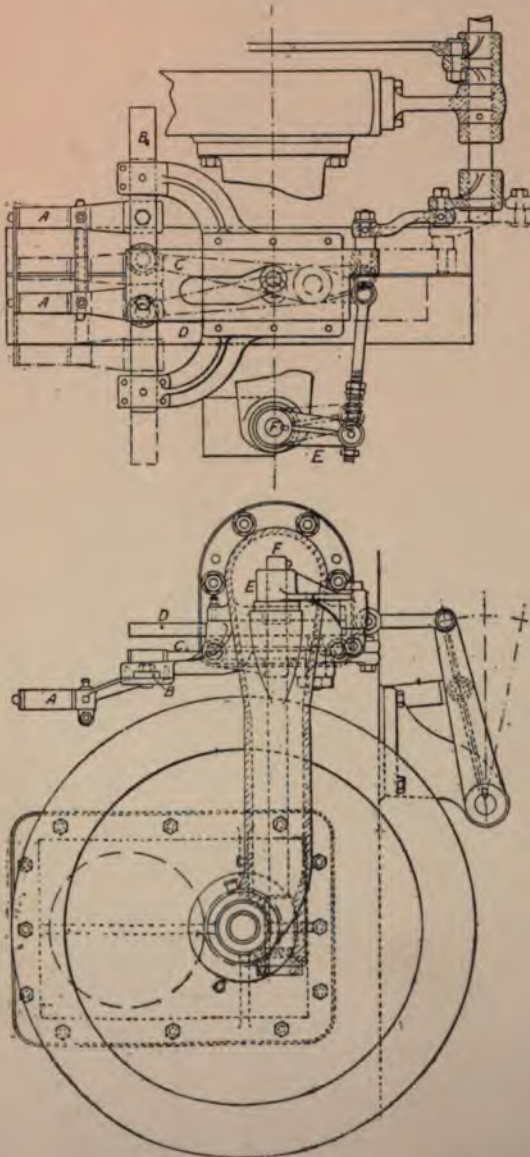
Cushioning Device for Planing Machine. (Bateman's Machine Tool Co., Ltd.)
